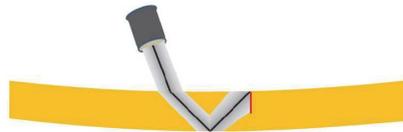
Inner Diameter Crack Detection Using a 45° Shear Wave (Full Skip)
